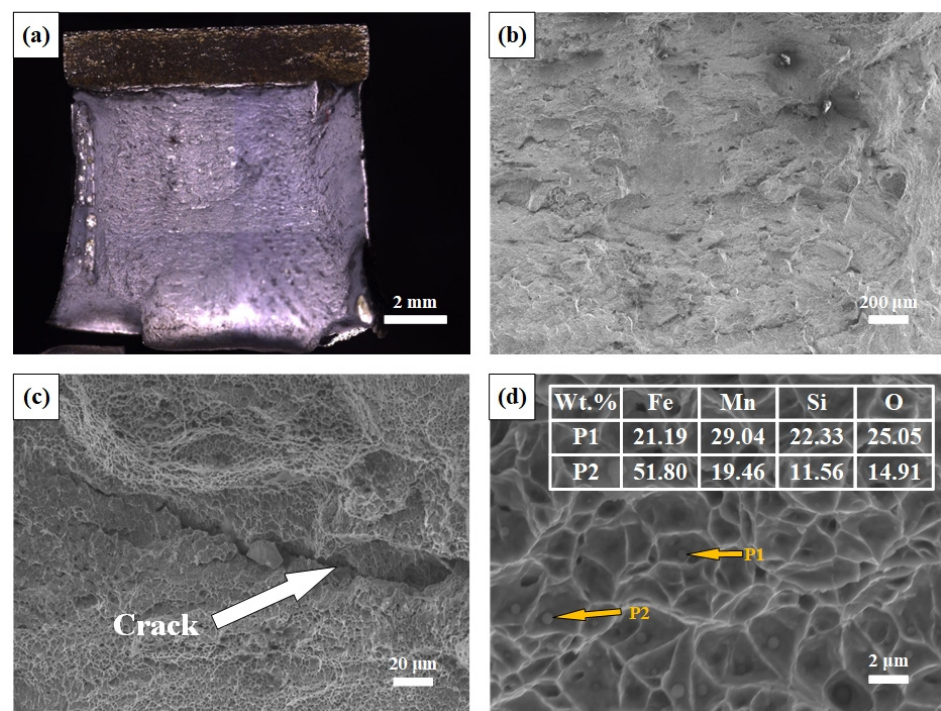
Charpy impact fracture of weld: (a) macrostructure; (b–d) SEM.
